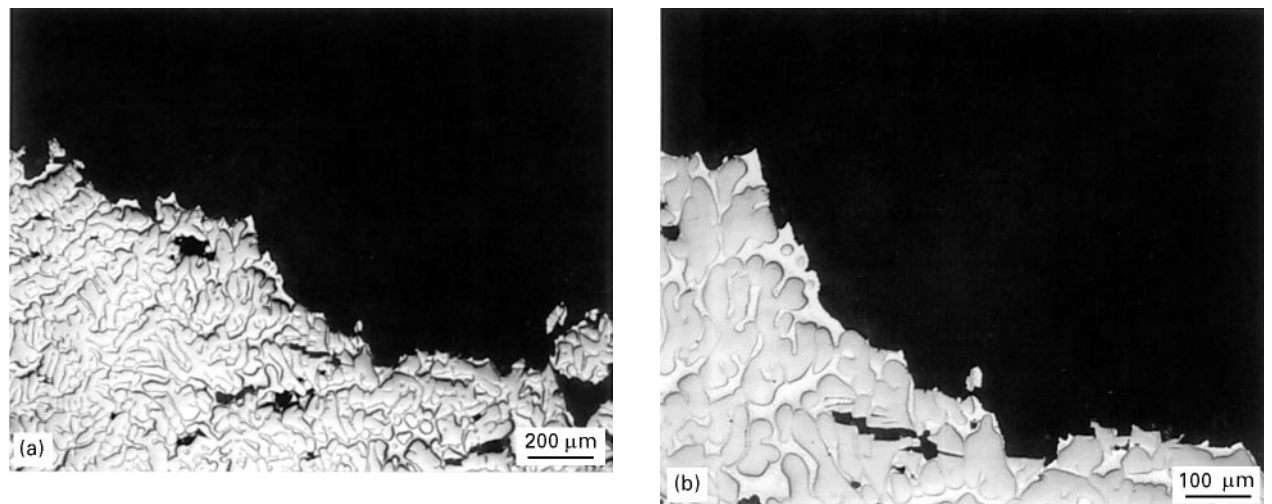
(a, b) Longitudinal sections through the fracture surface for a room-temperature tensile specimen of the cast material.
